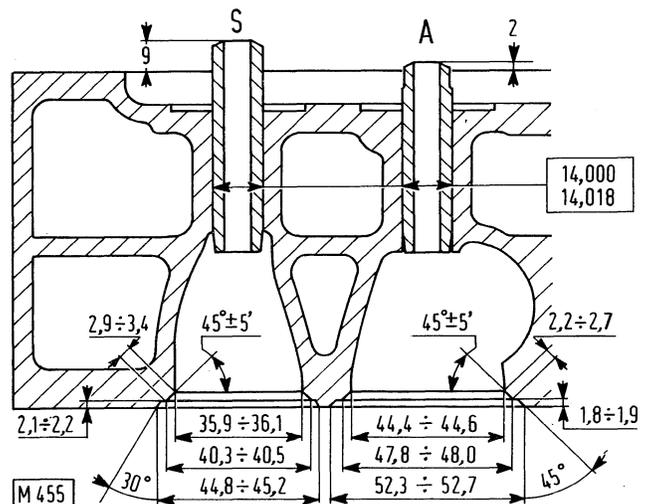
Valve seat, Guide Housing Bore and Guide Protrusion Details.
